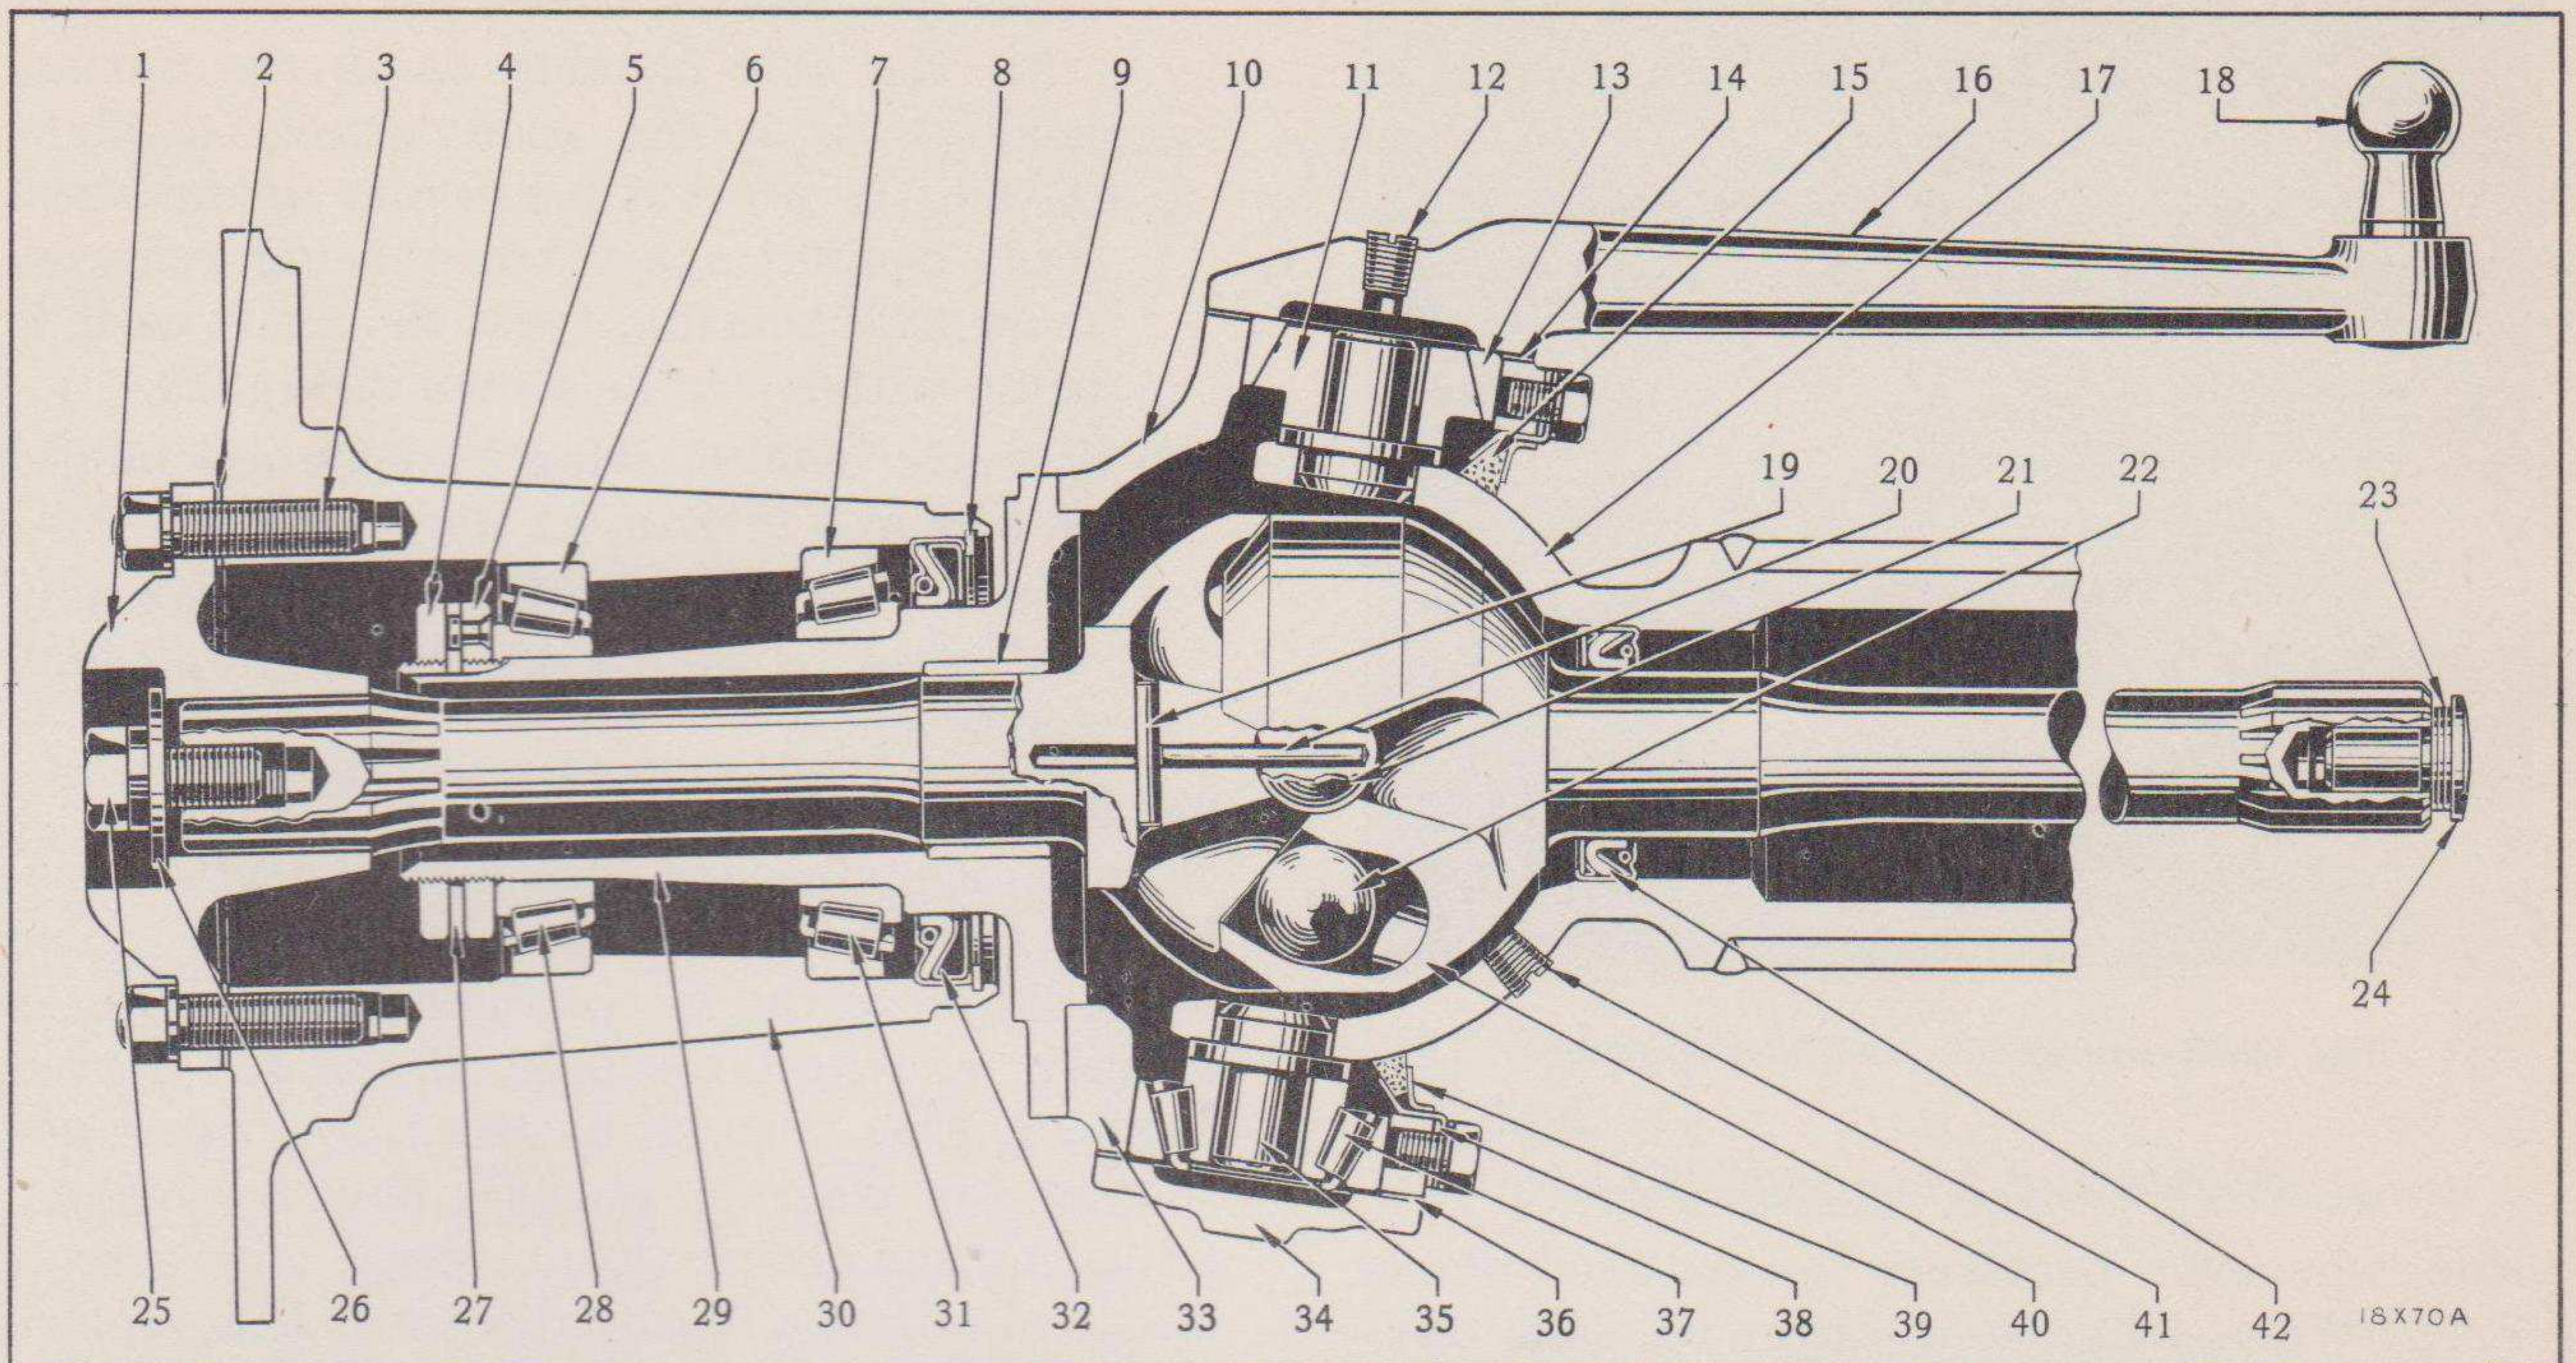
Front Axle with Bendix-Weiss Universal Drive (assembled view)
